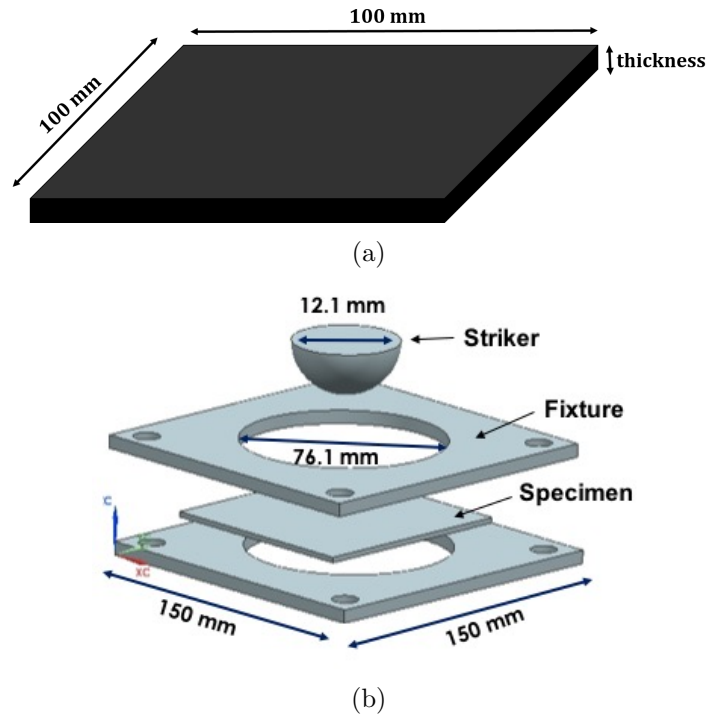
(a) Specimen dimensions; (b) Impact fixture schematic
